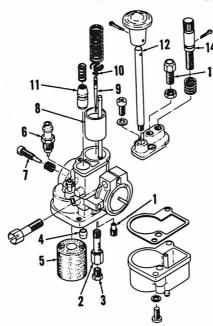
Exploded view of sliding valve carburetor used on the JT-1.
